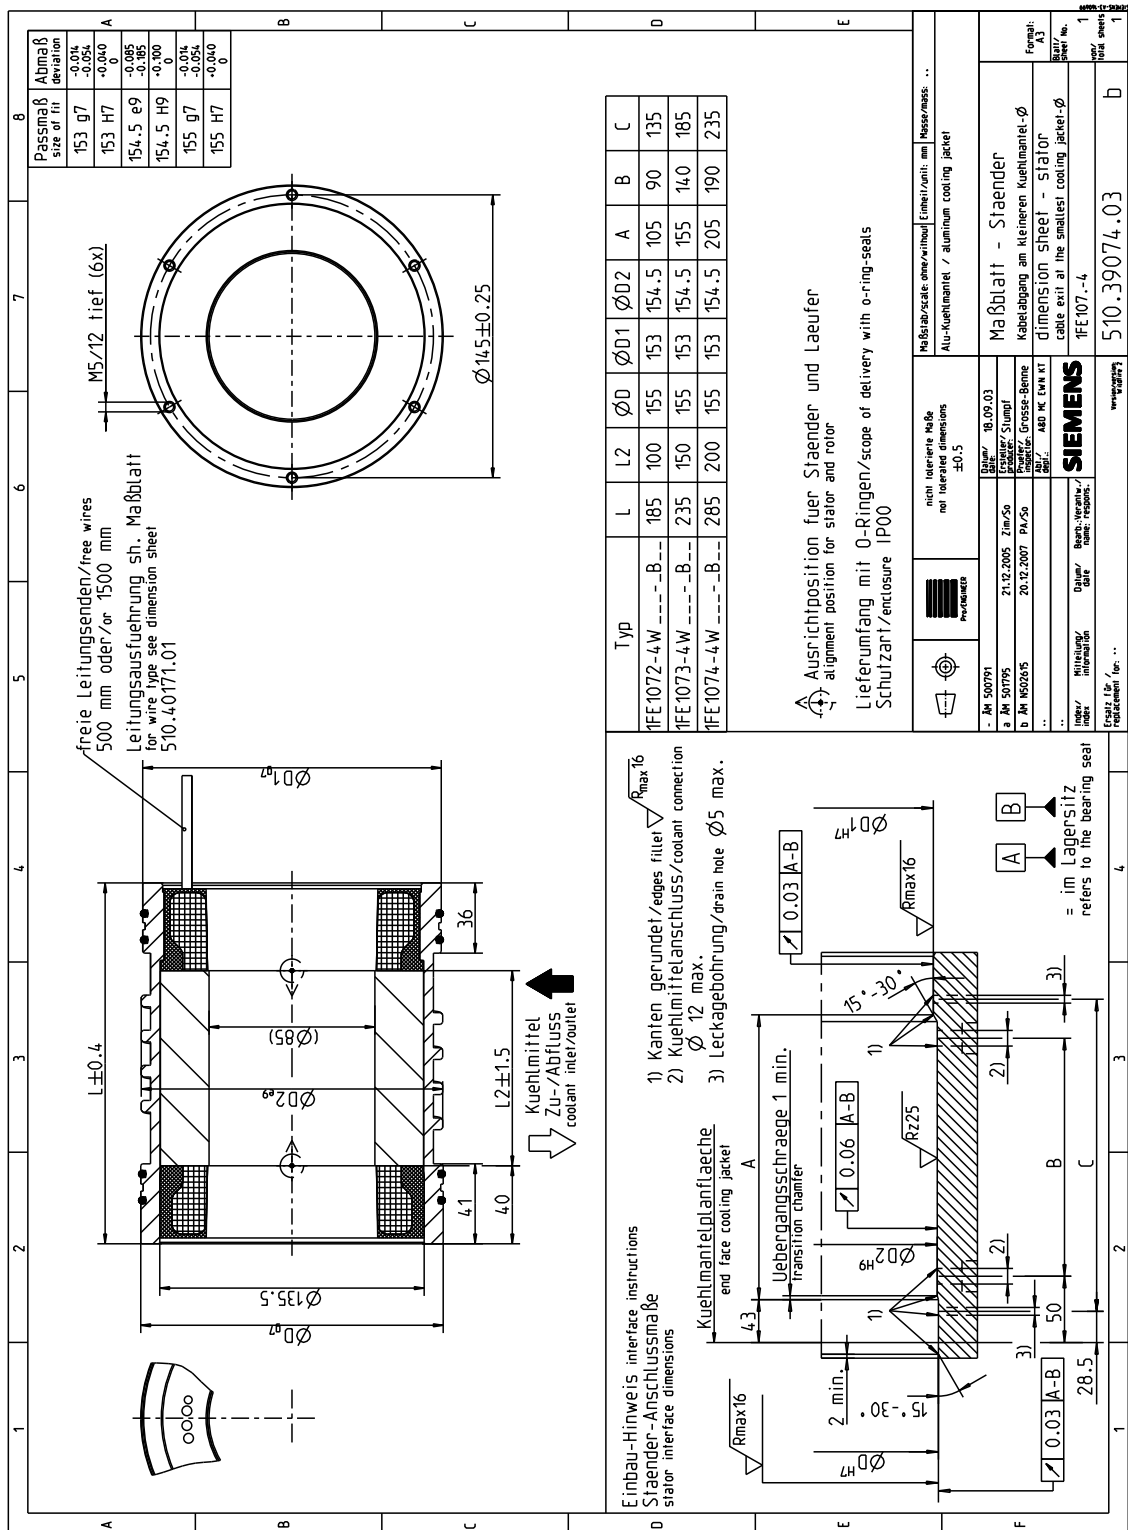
1FE107□-4, stator with cooling jacket, cable outlet at the smaller cooling jacket diameter
